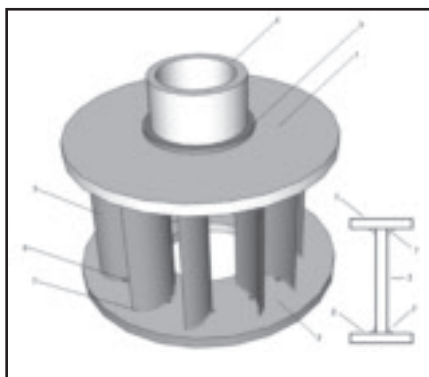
Titanium impeller assembled to be brazed: Design A. 1 and 2 — support plates, 3 — blades, 4 — tubing, 5 — braze preform, 6 — spot arc welding for fixing blades, 7 — brazing paste.
